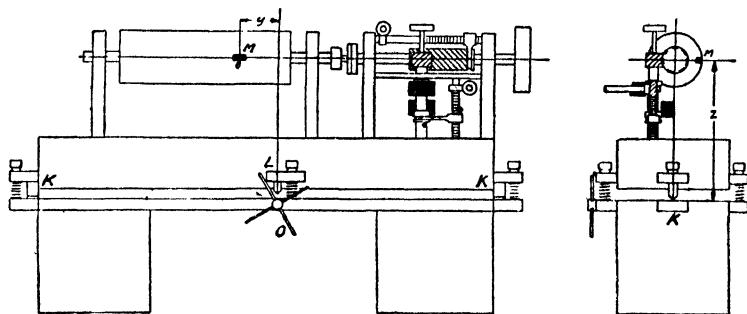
ILLUSTRATING PRINCIPLE OF OLSEN-CARWEN TYPE C BALANCING MACHINE
